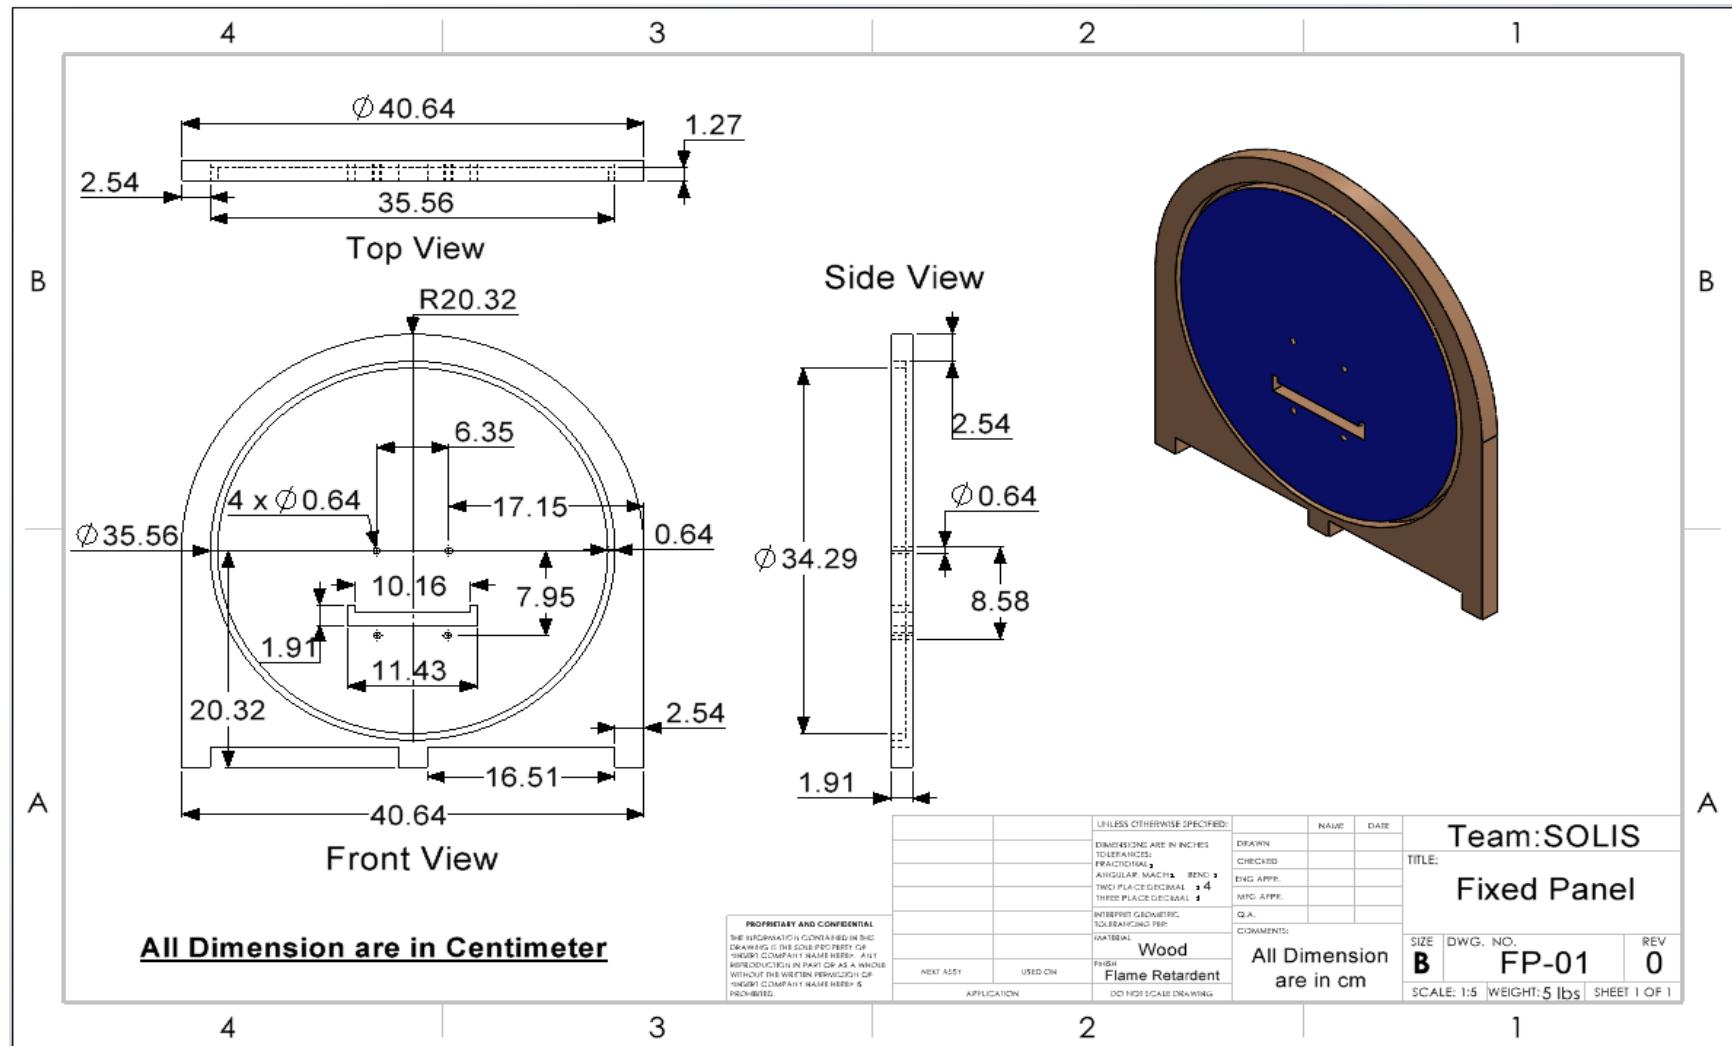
CAD Drawing Sheet of the Fixed Panel.
